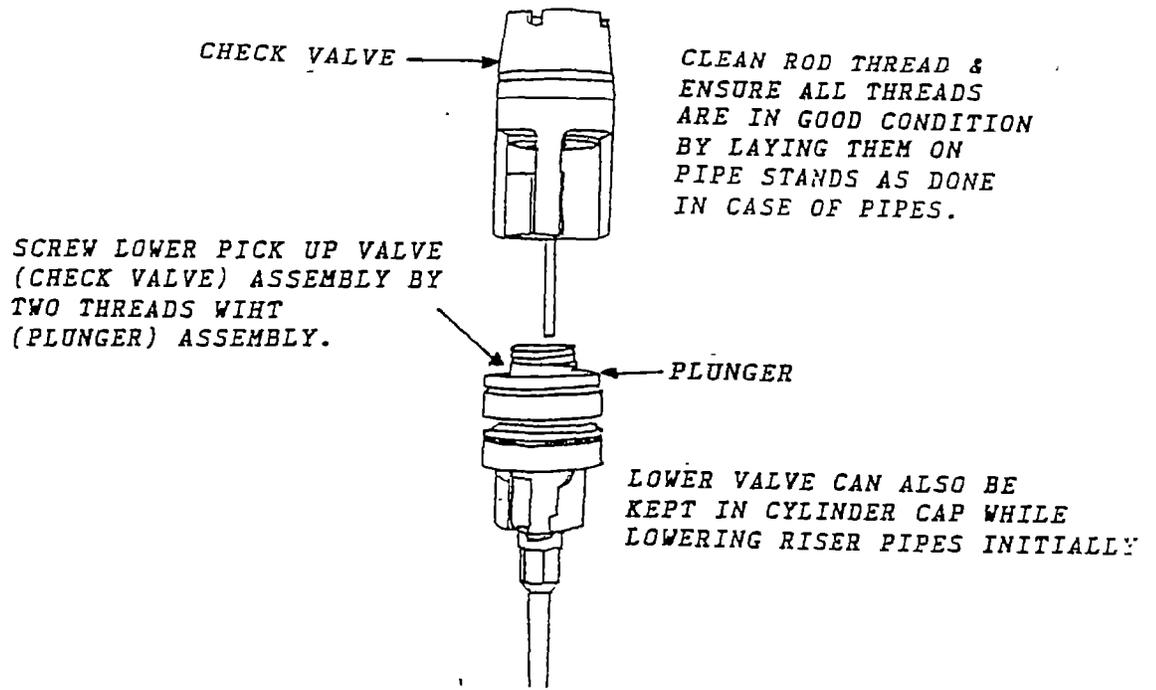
JOIN CHECK VALVE WITH PLUNGER.
